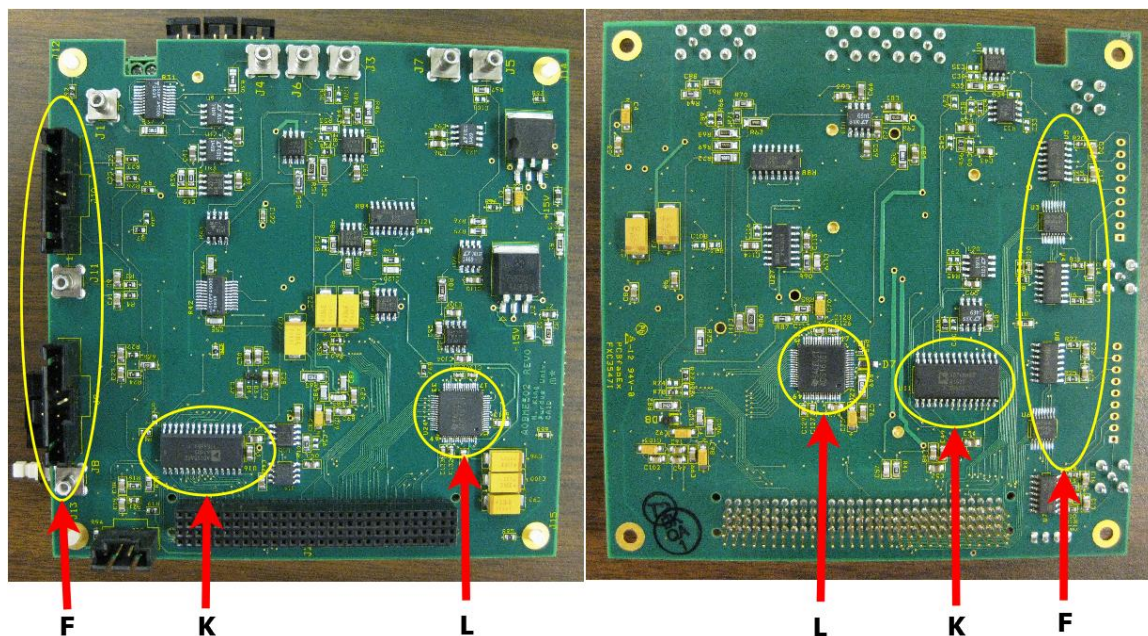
Top view (left) and bottom view of the Analog Interface Board, A0BME502
